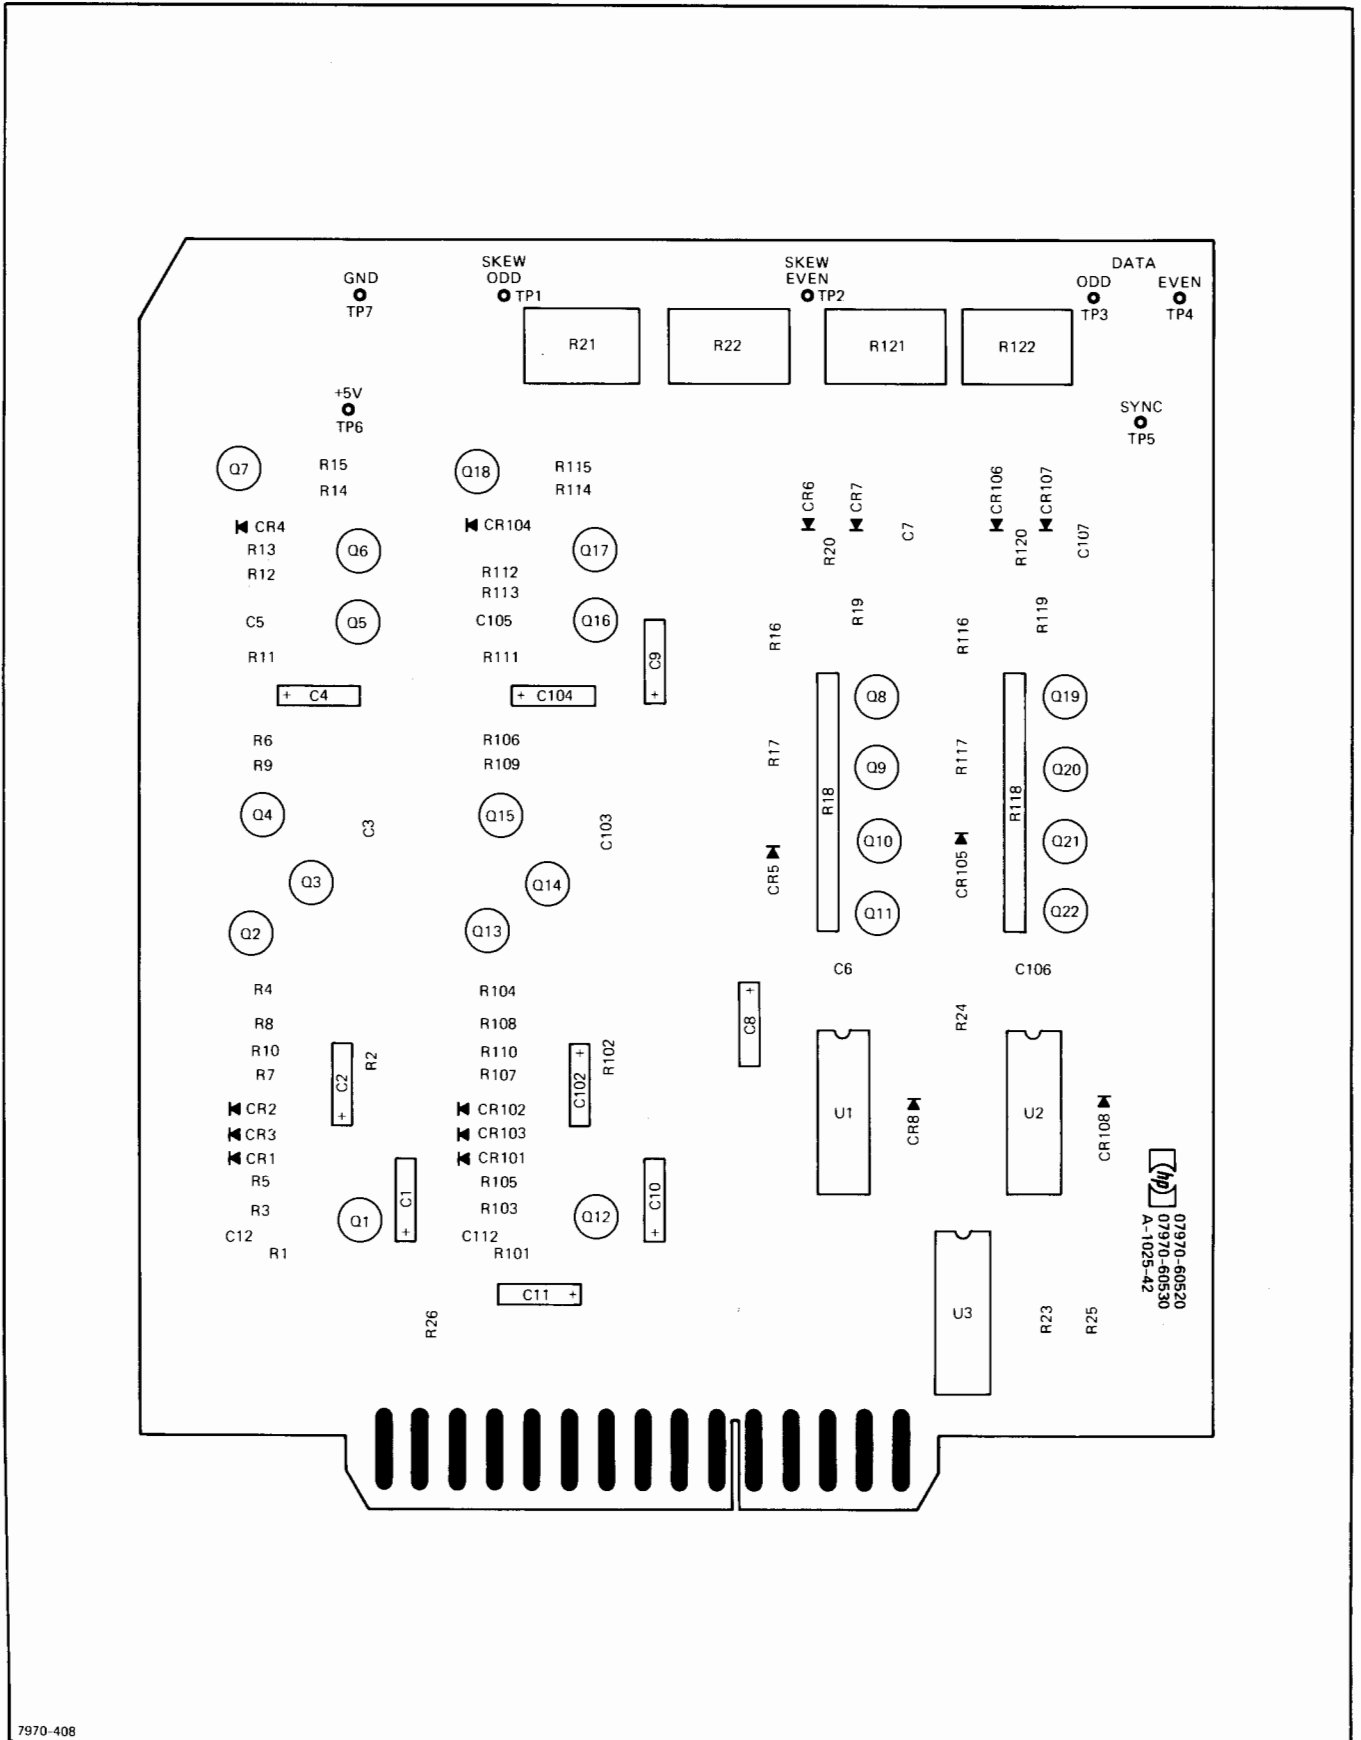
Dual-Channel Read Data PC Assembly A18A3 thru A18A6, Parts Location Diagram
